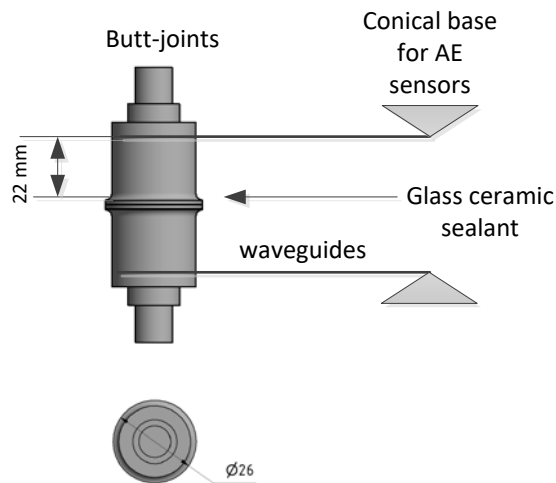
Schematic of the annular butt joints used as specimens in the tensile tests measurements [33].
